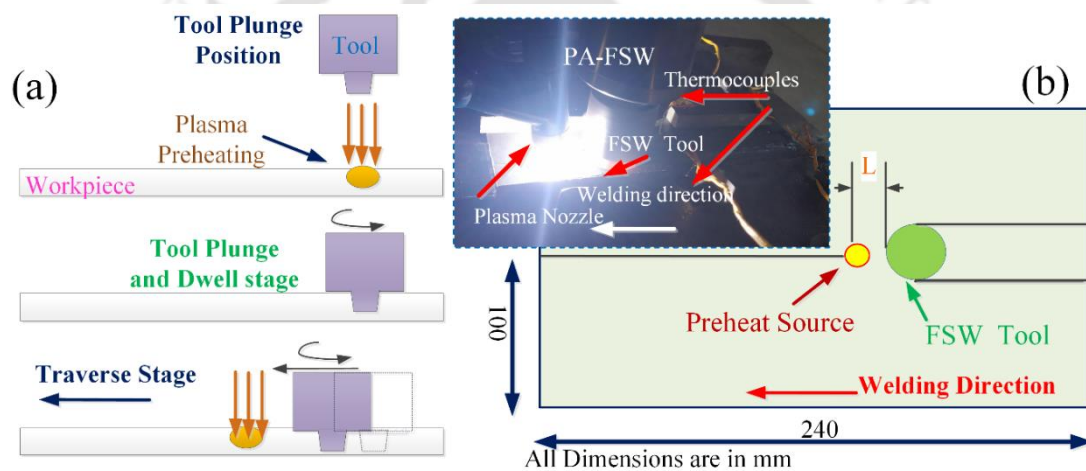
Plasma assisted friction stir welding (PFSW) process: (a) illustration of preheating stages of PFSW process, and (b) plasma heat source layout ahead of the FSW tool
